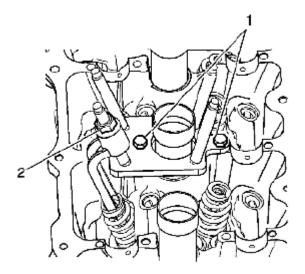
Identifying Special Tool EN 46106 Courtesy of SUZUKI OF AMERICA CORP.
